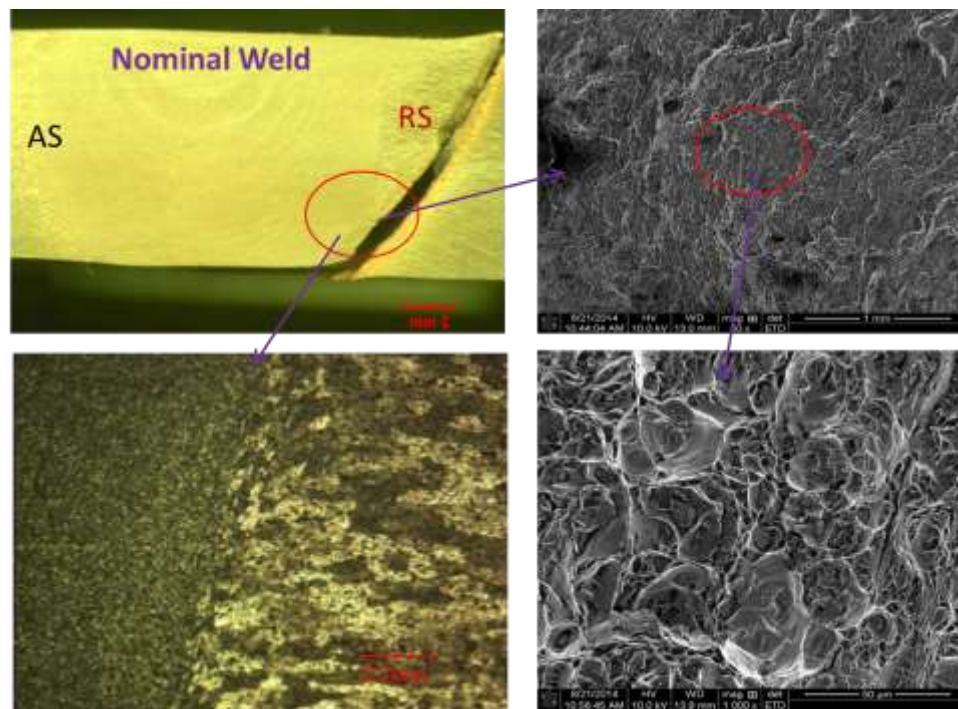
Nominal weld showing no defect. A 45° maximum shear fracture is on retreating side of tool outside the weld nugget in heat-affected base metal. Fracture surface exhibits ductile fracture dimples, larger corresponding to base metal and weld nugget.
